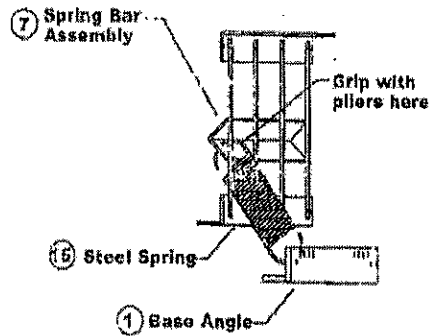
Detailed view of attaching spring from base angle to spring bar assembly (weldment).
